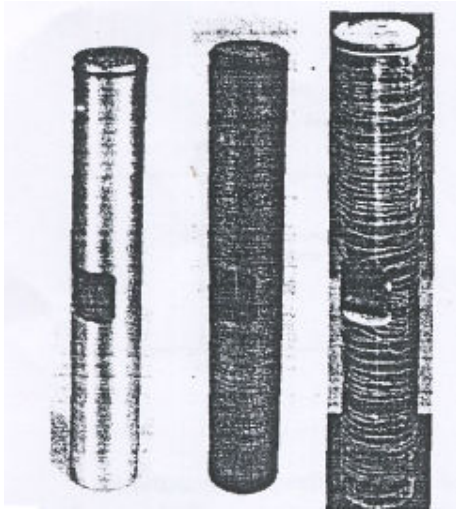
A front axle kingpin for a truck (Left) As manufactured and apparently sound. (Center) Inspected under conventional magnetic particle inspection to reveal numerous grinding-induced cracks. (Right) Fluorescent particles and ultraviolet light make the cracks even more visible. (Courtesy Magnaflux Corporation.)
